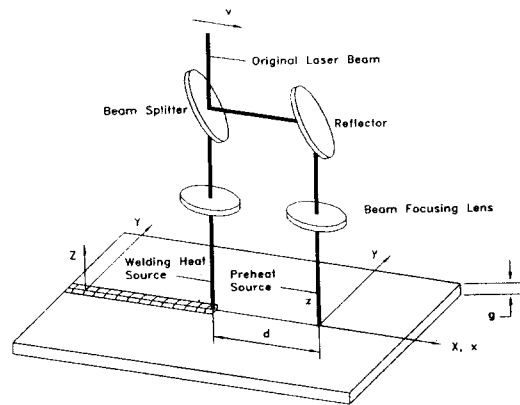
Schematic of the dual-beam laser welding system
